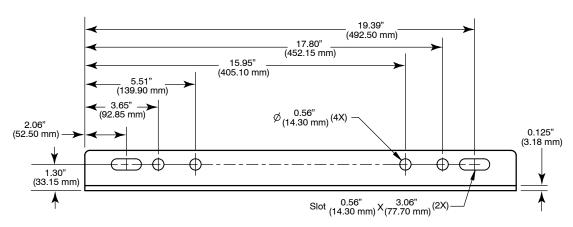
Stabilizing Bracket Floor Bolt Pattern
